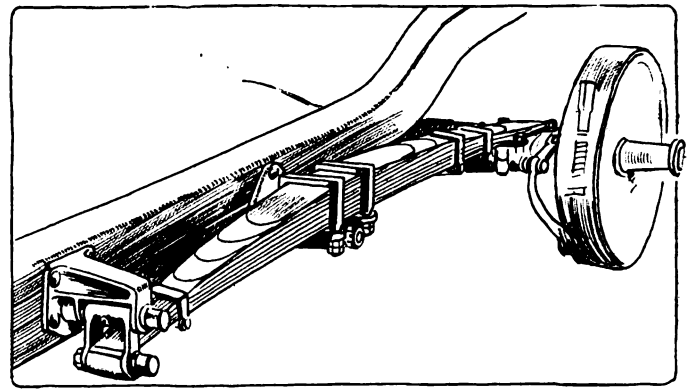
Cantilever spring construction showing attachment to frame and axle
